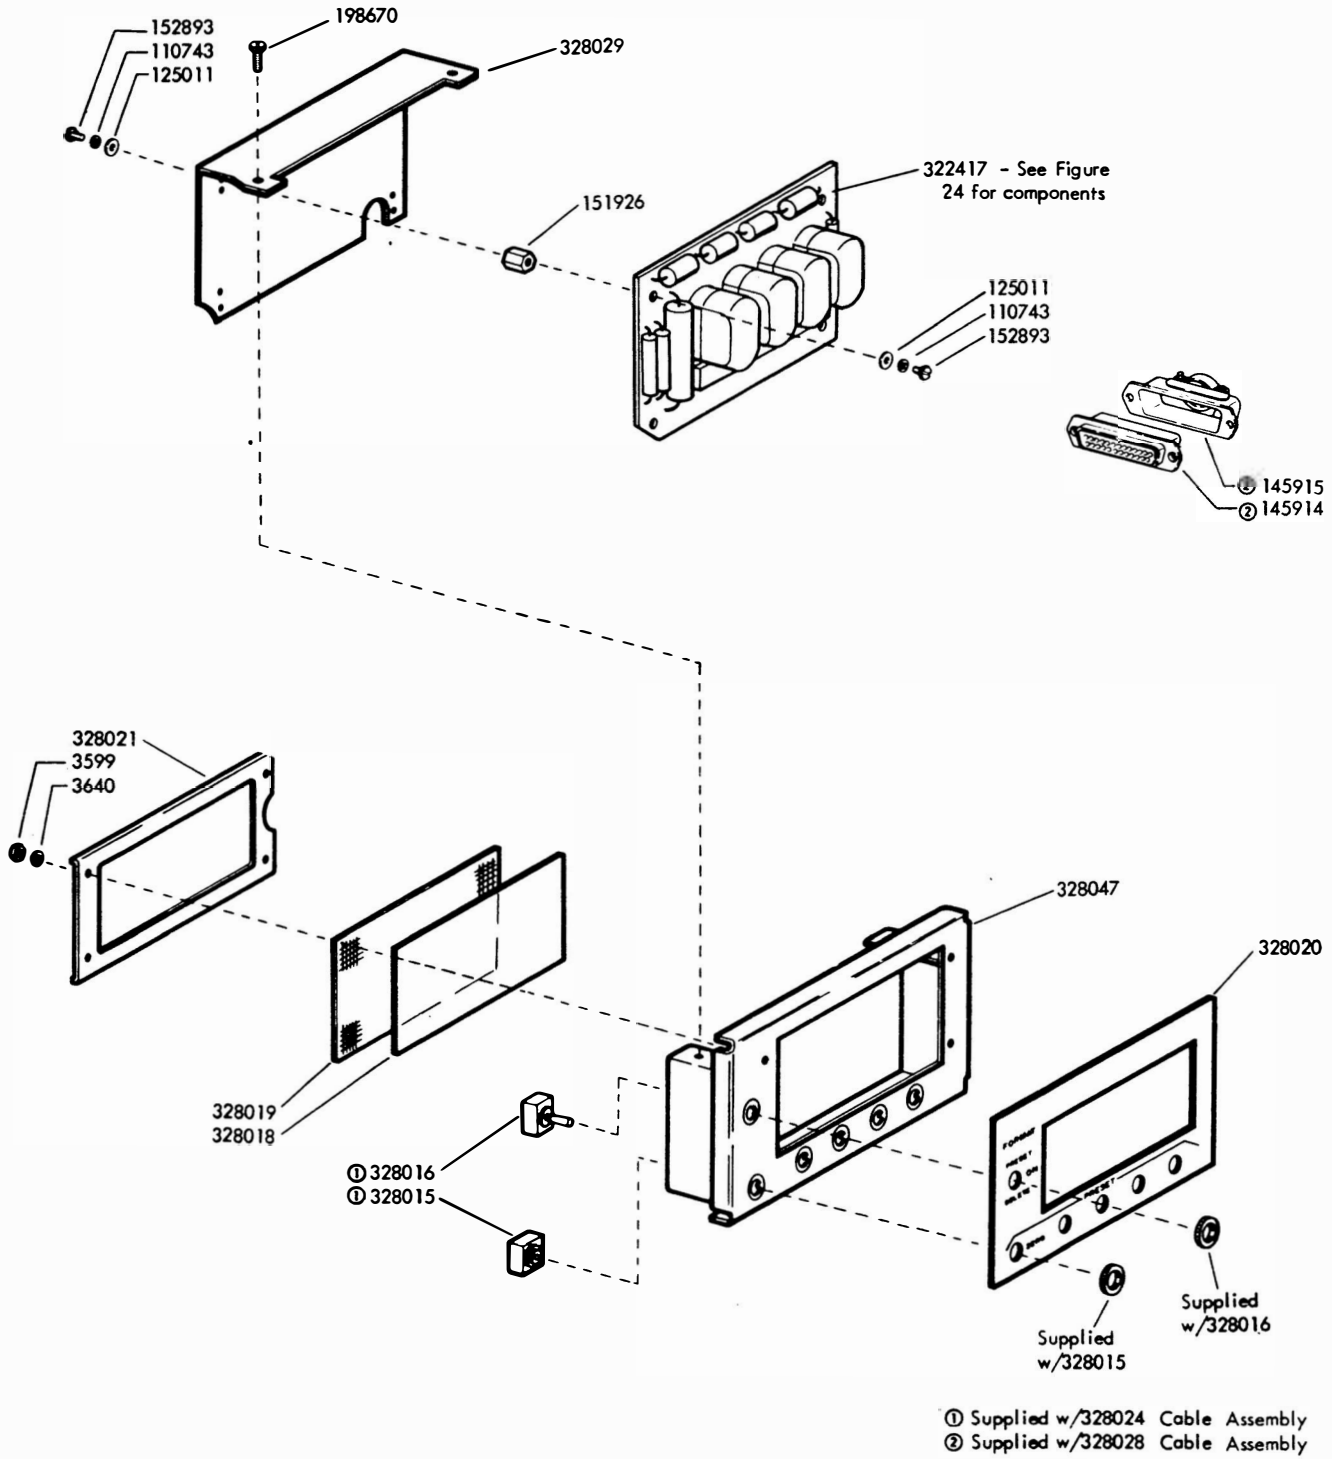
328017 FRONT PLATE ASSEMBLY (PART OF 330650 SEE FIGURE 6)
